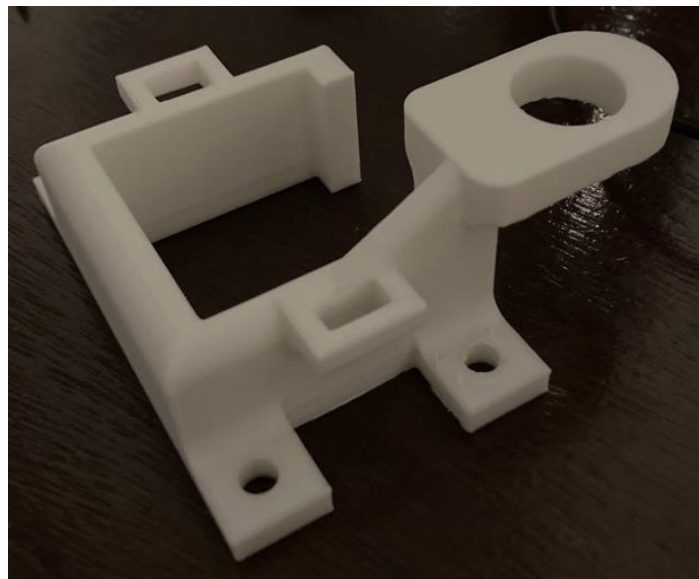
Image of the 3D printed motor mounts used in the prototype rover
